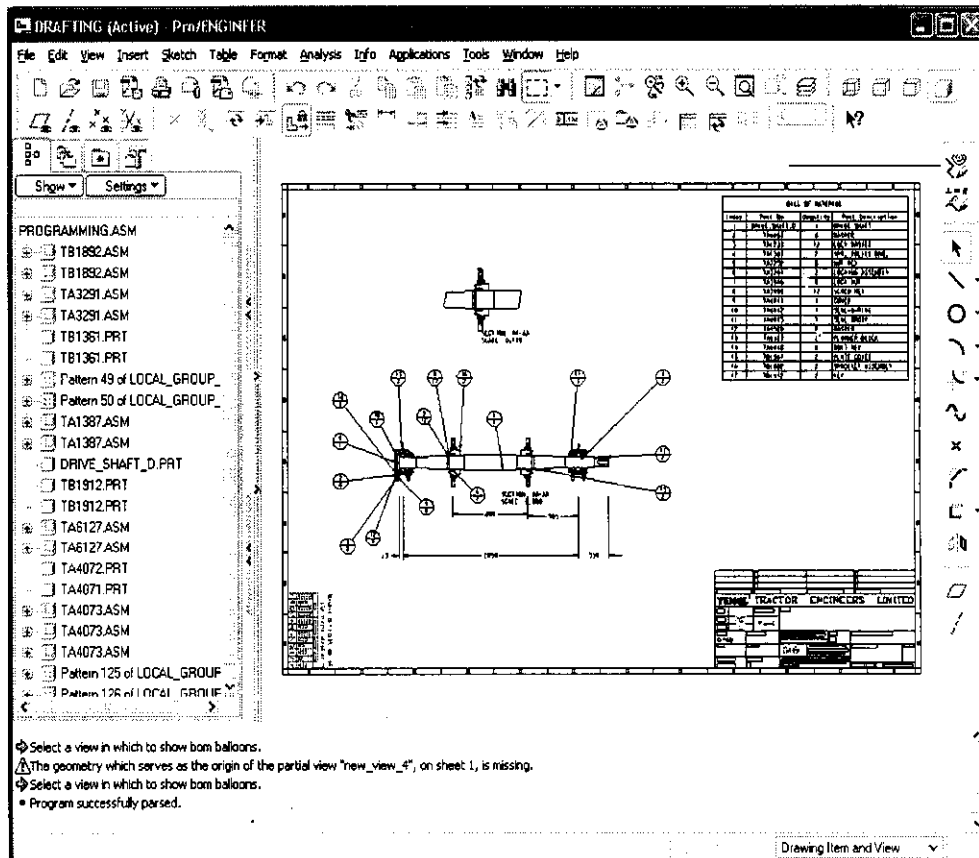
Drafting output of Direct type Drive Wheel Assembly
